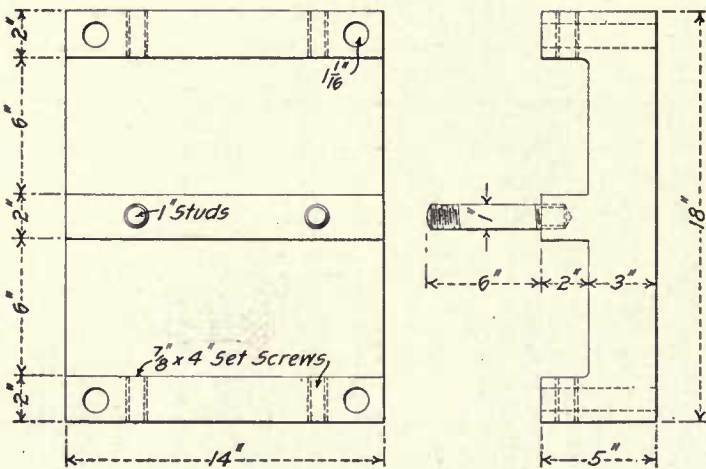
Chuck to Hold Engine Truck Pedestals on Slotter.
